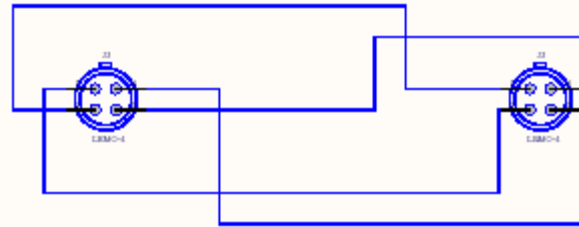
1PPS Sync Pulse Test Cable Assembly
